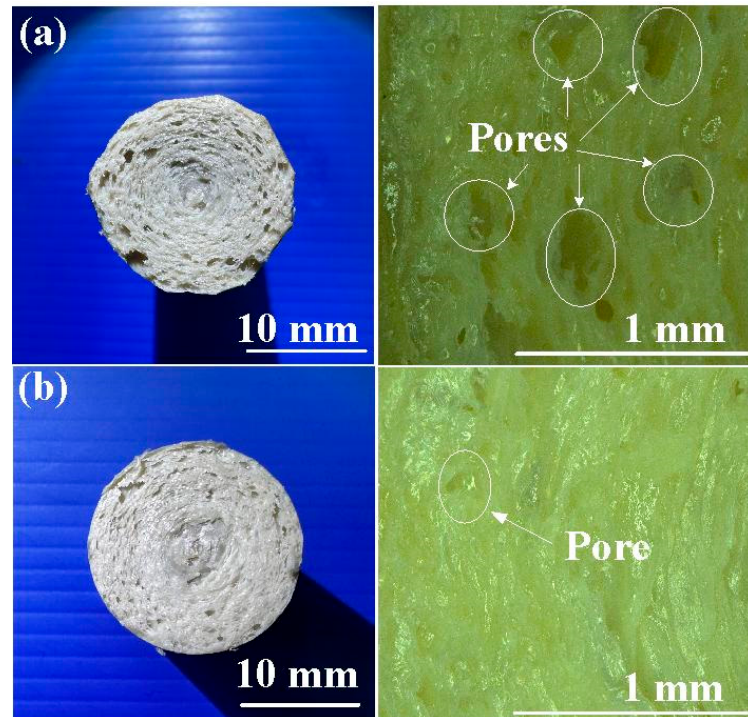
Fracture surfaces of the welded parts after bending tests with (a) burn-off length of 1 mm and (b) burn-off length of 1.6 mm.
